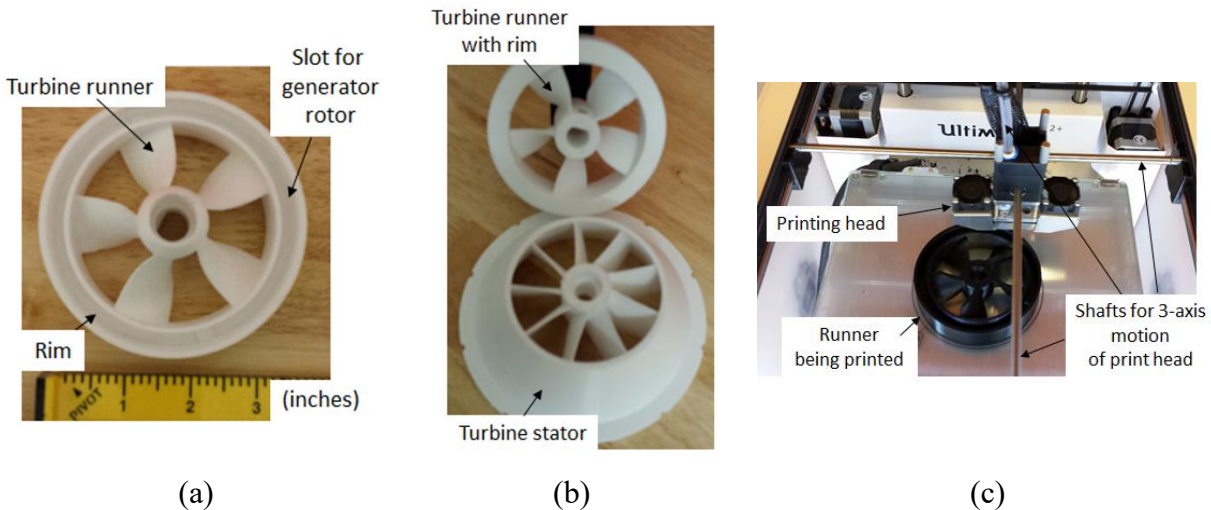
Turbine prototype made from 3D printing process. (a) Runner (b) Runner and stator (c) Runner being manufactured
